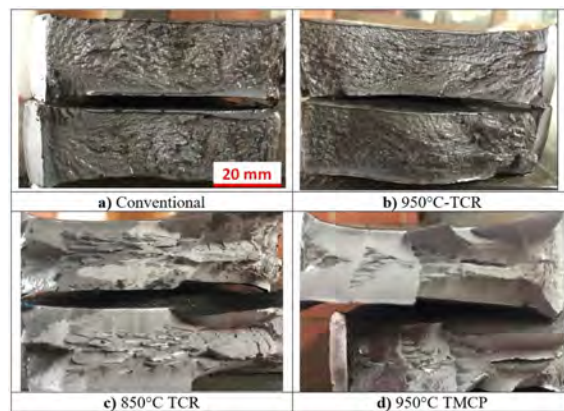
Fracture surfaces of the DWTT samples; a) conventionally rolled, b) finish rolled at 950°C, c) finish rolled at 850°C, and d) finish rolled at 950°C and accelerated cooling applied.
